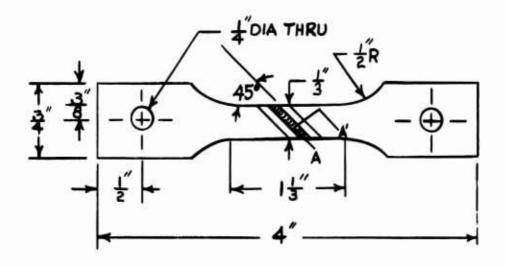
Welded Test Specimens Used in the "Gleeble".
